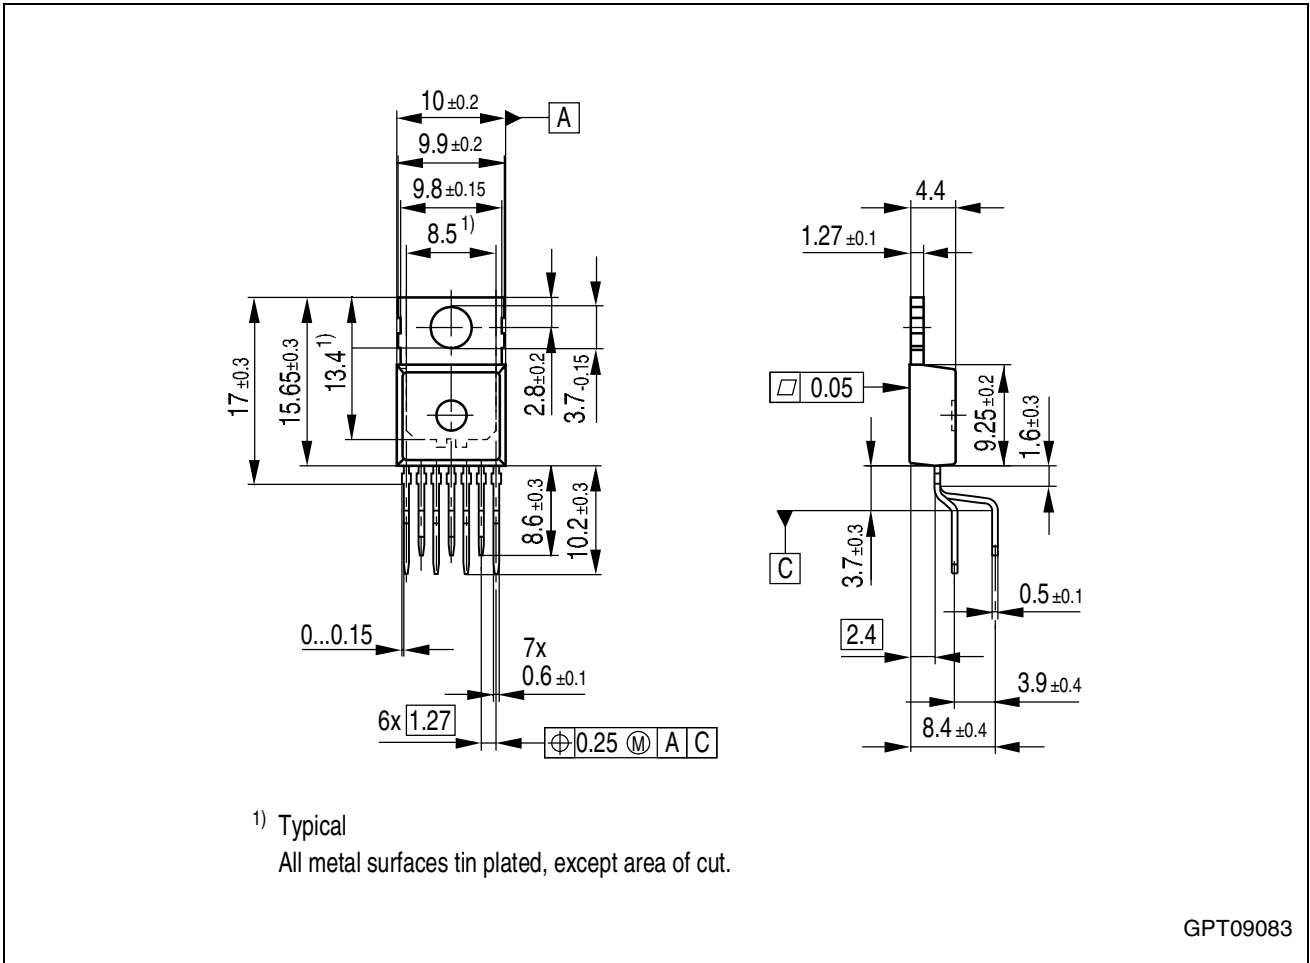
P-T0220-7-11 (Plastic Transistor Single Outline)
